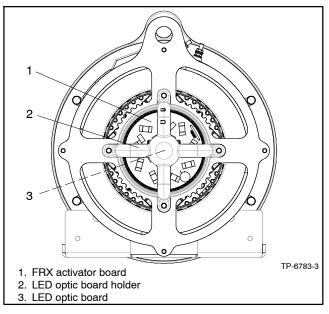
FRX Activator Board with LED Optic Board Installed.
